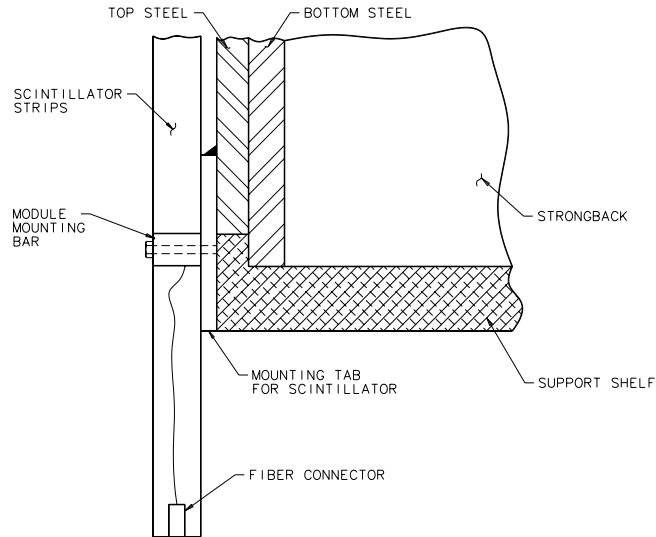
Sketch showing how the lower end of a scintillator module is attached to its steel plane using the module mounting bar and the mounting-tab edge bracket welded to the steel plane. The drawing also shows the strongback support shelf which supports the weight of the plane as it is raised into a vertical orientation prior to mounting. The other end of the scintillator module is attached in the same fashion, except that the strongback support shelf is replaced by a steel plane restraining clip on the upper end.
